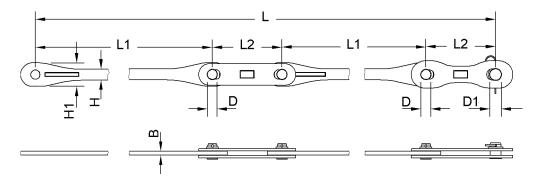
Dimensions of reducing piece pendant strap 40 ft
